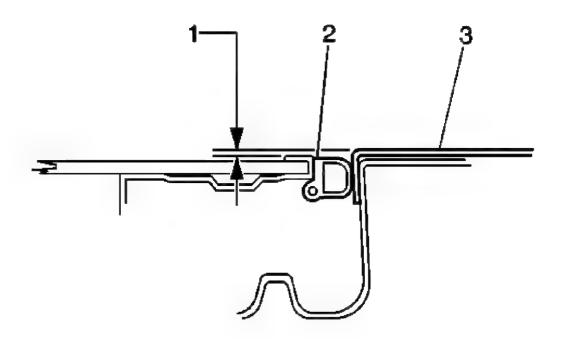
Adjustment of Front of Sunroof Window Below Top Surface of Roof Panel
